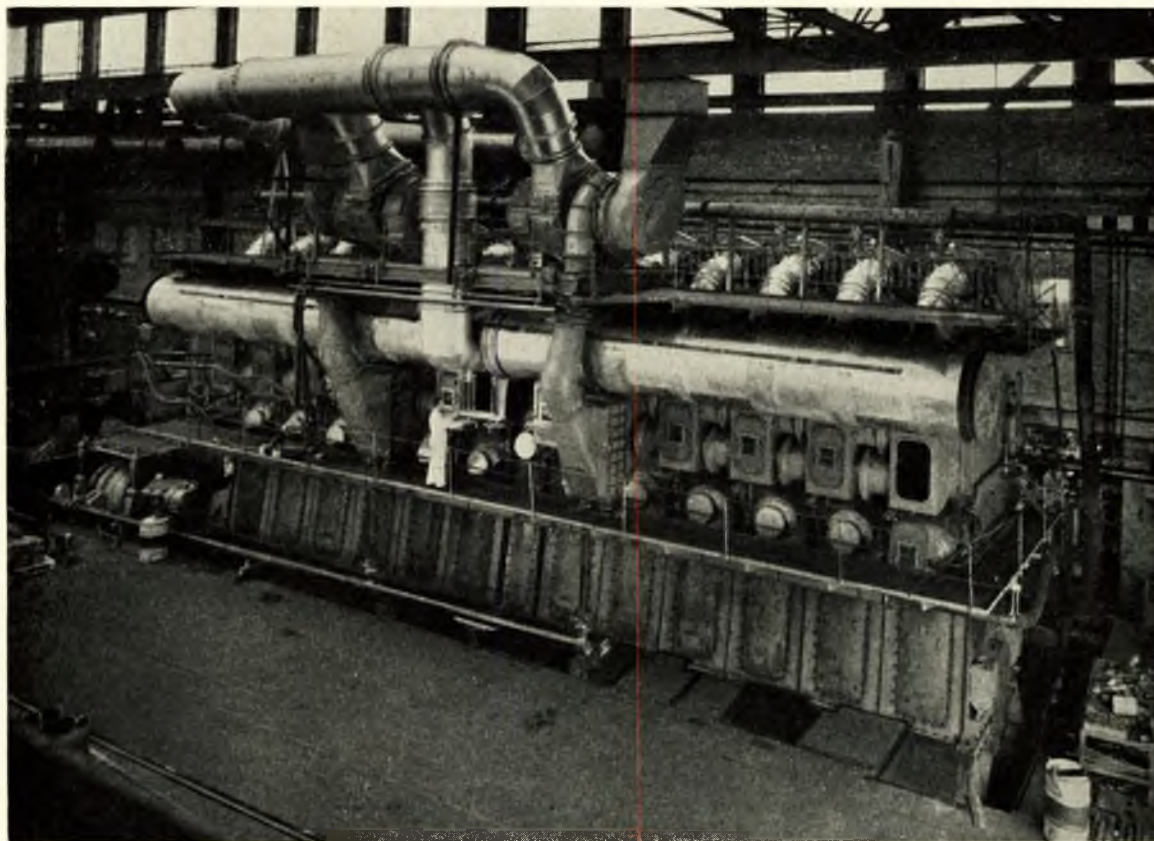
760/1500 VGS-12U Götaverken engine built in 1959, developing 15,000 b.h.p. at 112 r.p.m.
